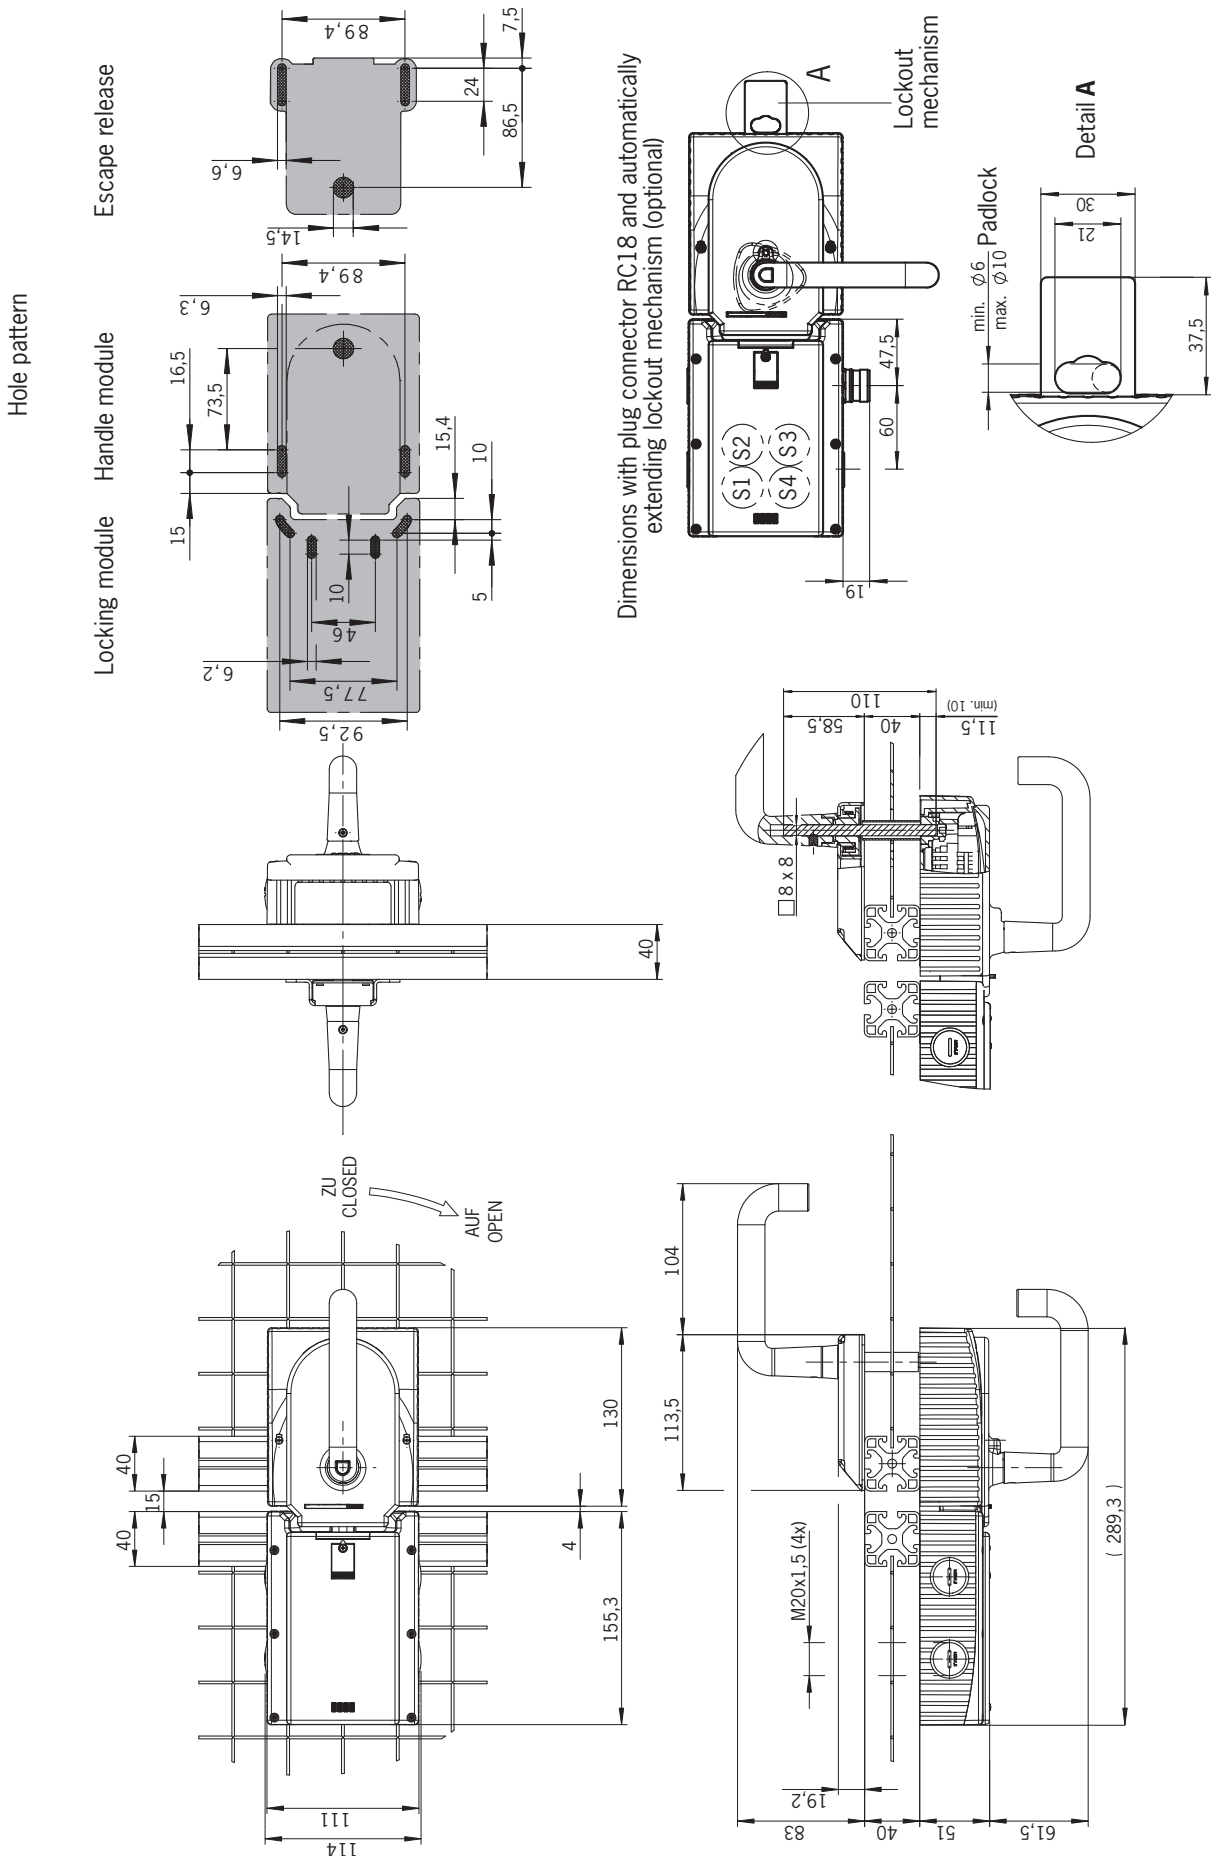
Dimension drawing – MGB mounted, without optional mounting plates
